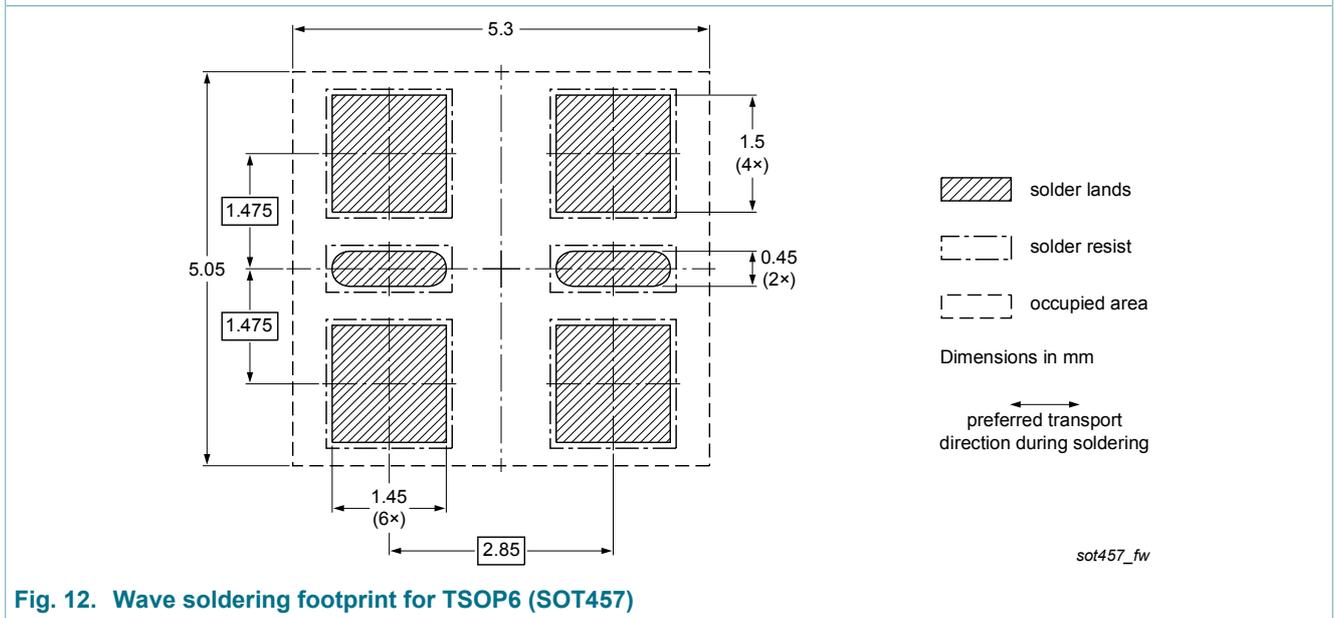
Wave soldering footprint for TSOP6 (SOT457)
